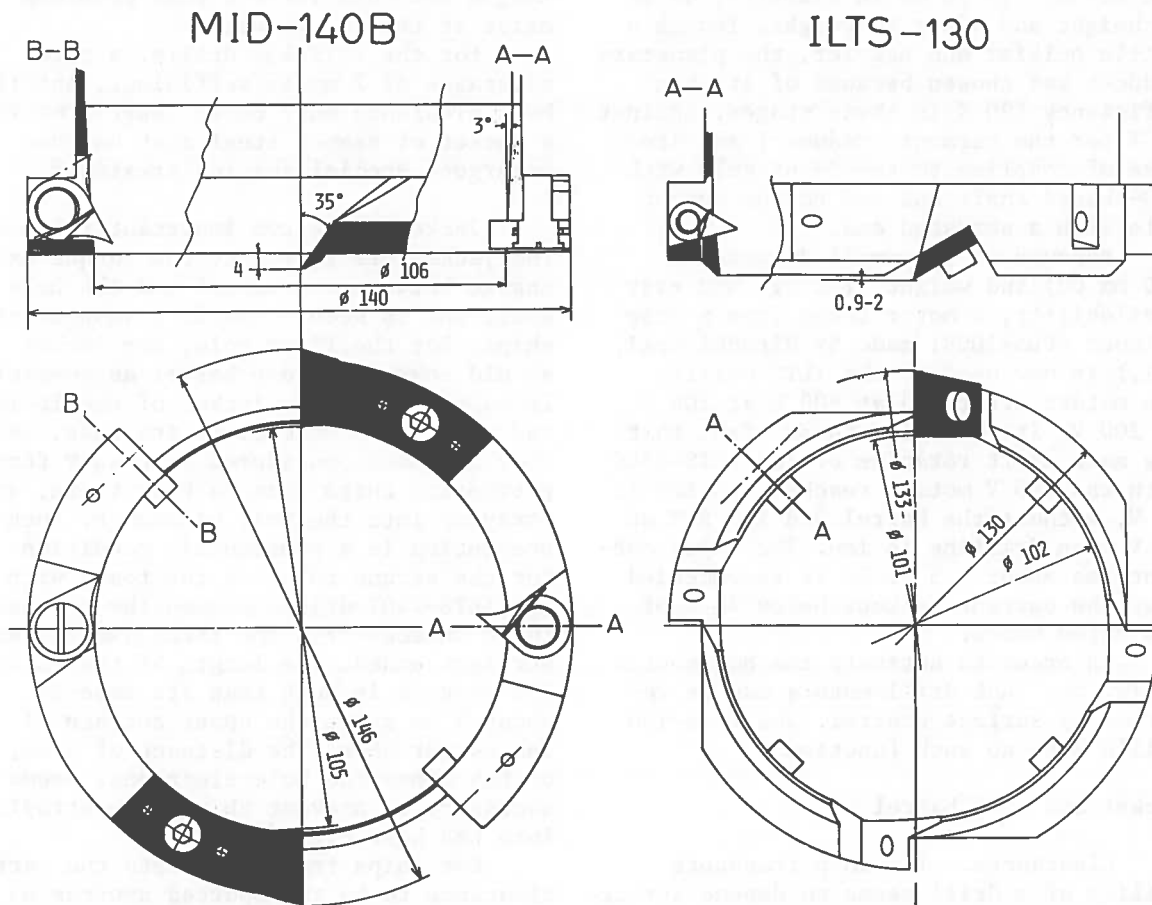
Cutter shoe assemblies of the MID-140B and ILTS-130C drills.
